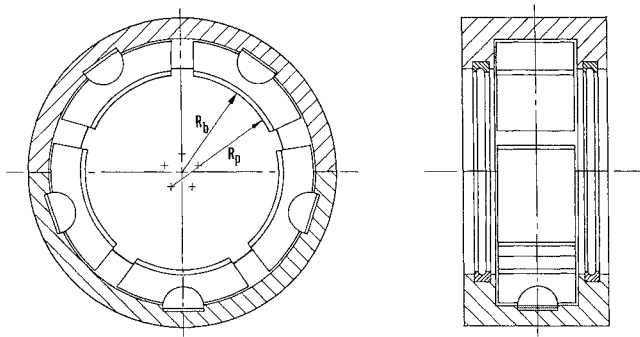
Spherical Pivot Tilting-Pad Journal Bearing.
